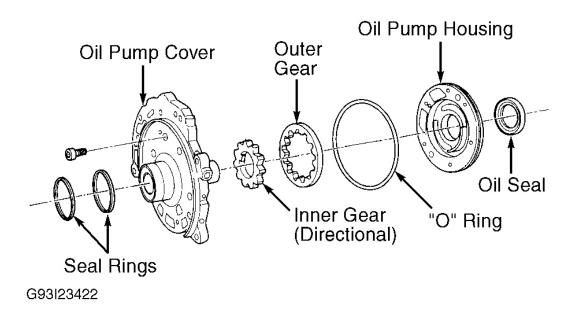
Exploded View Of Oil Pump Assembly Courtesy of NISSAN MOTOR CO., U.S.A.
